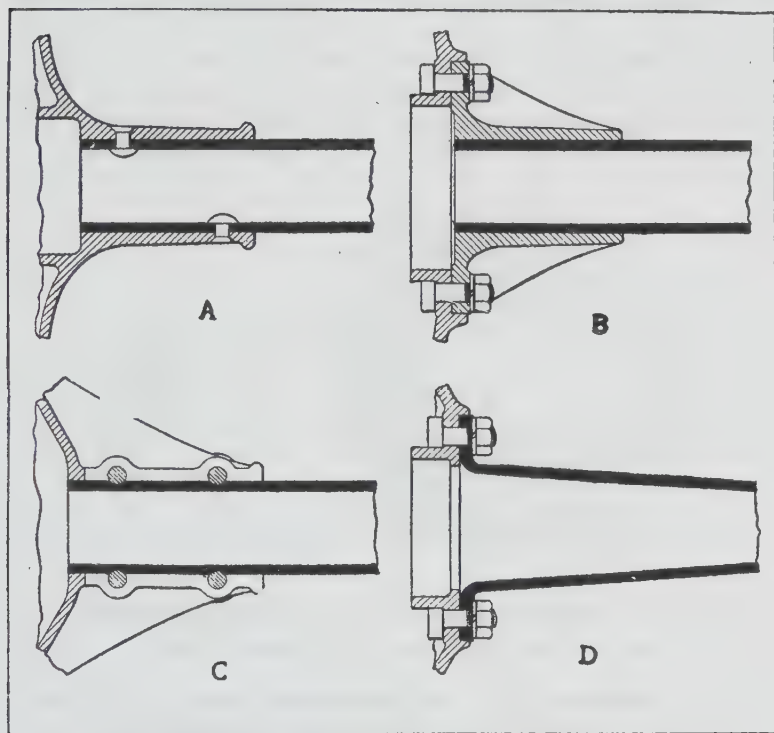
METHODS OF SECURING AXLE TUBES TO DRIVING GEAR HOUSING.
